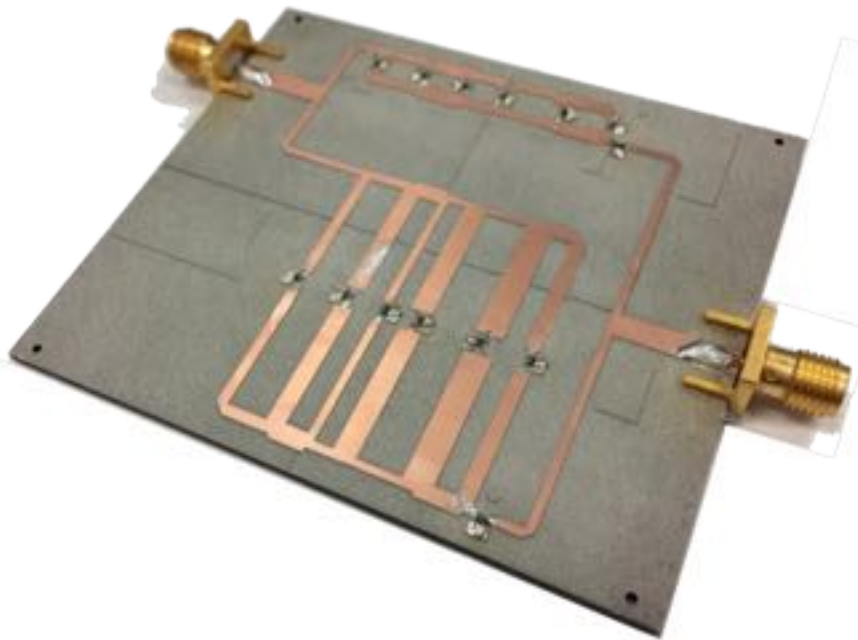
Photo of the RF-SIC filter after assembly and soldering.
